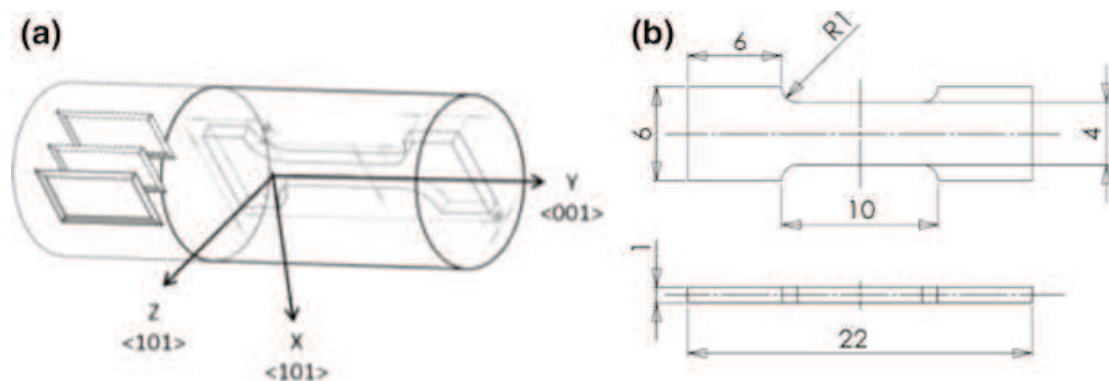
a Scheme of the tensile specimen machining in the single crystal nickel bar, b geometry of the flat tensile specimens. The dimensions are given in mm
